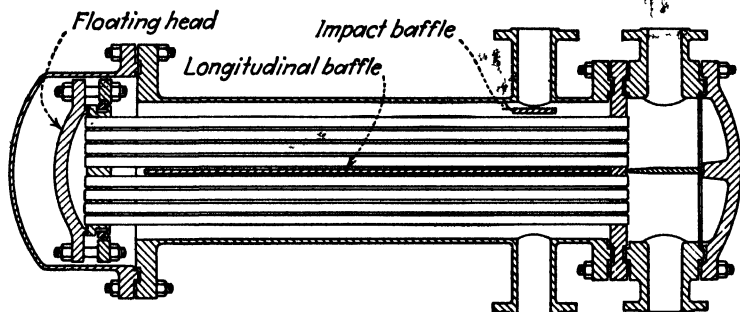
Cross section of a shell-and-tube heat exchanger equipped with a full floating head.
